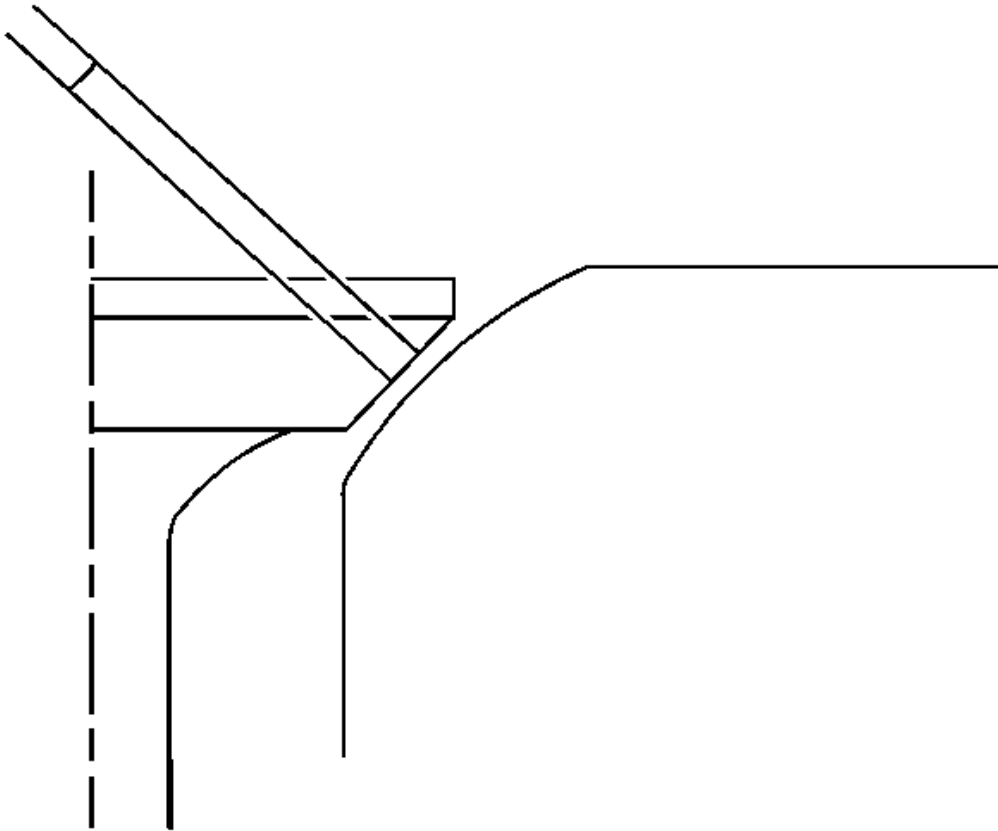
View Of Valve Head To Cylinder Head Contact Pattern
